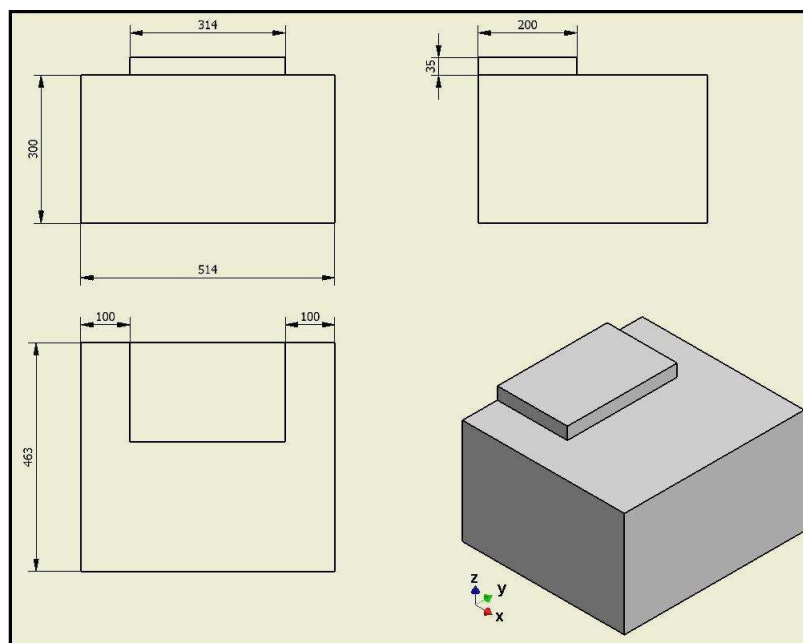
Measured available space below ADT seat for suspension mechanism (dimensions in mm)
